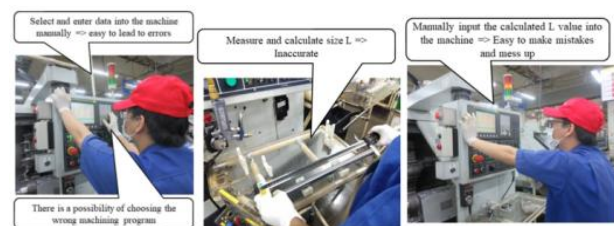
Operators of CNC machines at work. a) From the screen of the manual control panel, choose the CNC machine’s machining program. Utilizing 0-700mm callipers, determine the product’s length and document the manual production control check sheet findings. b) Manually enter the offset parameter value for the CNC machining program on the control panel screen.
